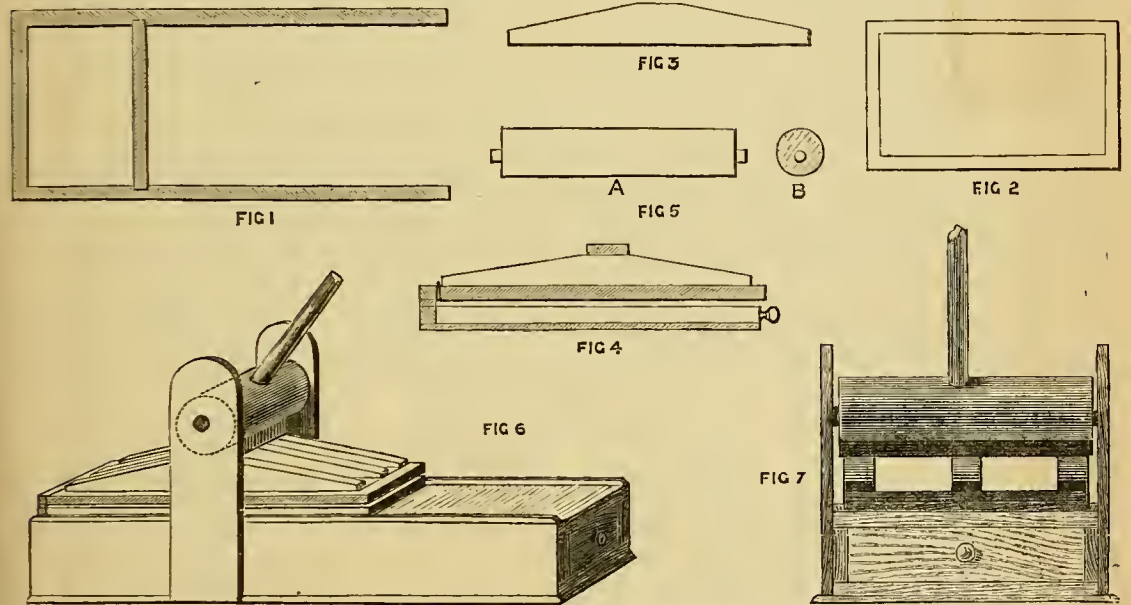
SECTION OF FRAME OF HOME-MADE PRINTING PRESS. FIG. 2.—FRAME OF CARRIAGE. FIG. 3.—PIECES FOR TOP OF PLATEN. FIG. 4.—CARRIAGE COMPLETE, SHOWING HINGING. FIG. 5.—FRONT ELEVATION (A) AND END ELEVATION (B) OF IMPRESSION ROLLER. FIG. 6.—PERSPECTIVE VIEW OF PRESS, COMPLETE. FIG. 7.—END ELEVATION OF PRESS.
